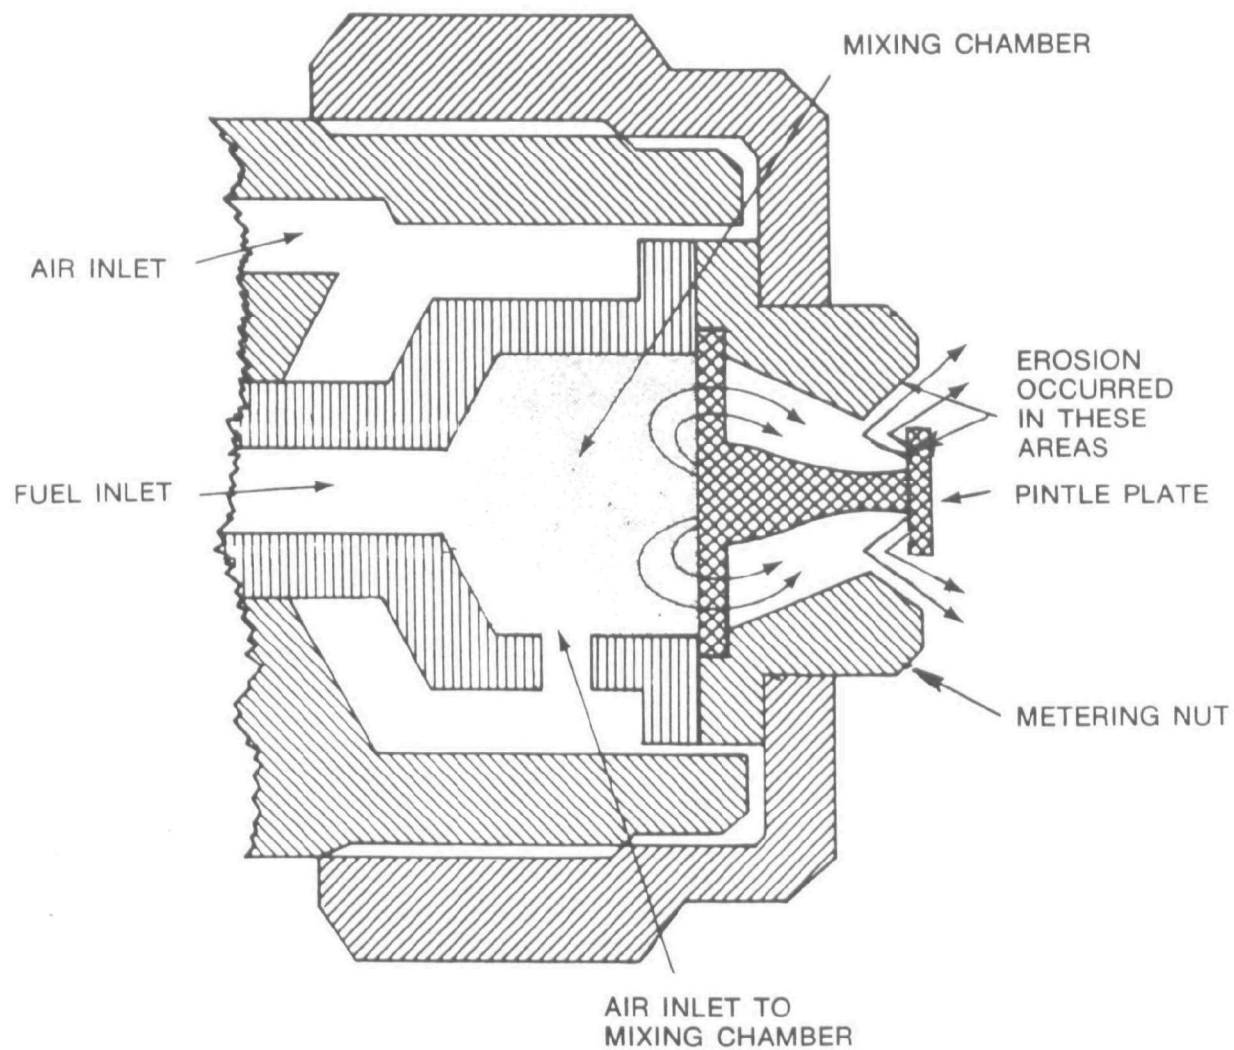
Delavan swirl-air nozzle, 33373-1, 60 gph, 70° spray angle, mild steel construction.
